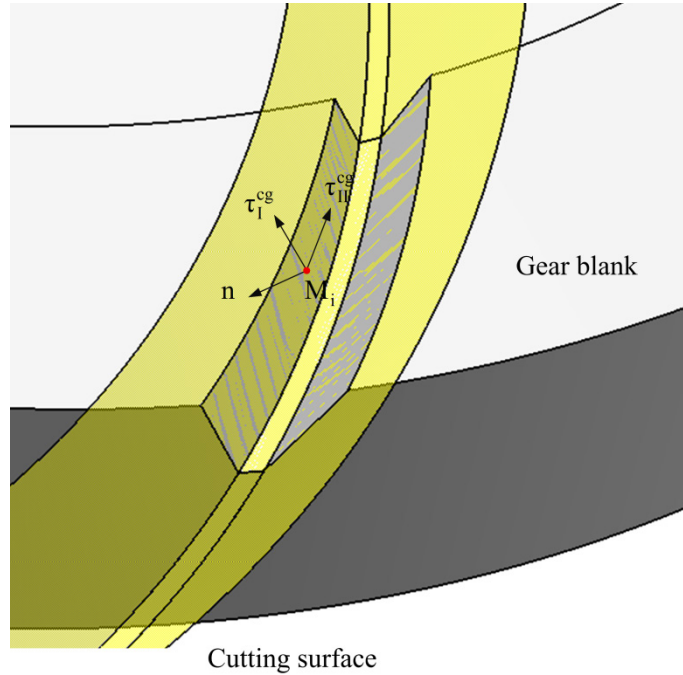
Gear tooth machined by a cutting surface using the non-generated face milling
